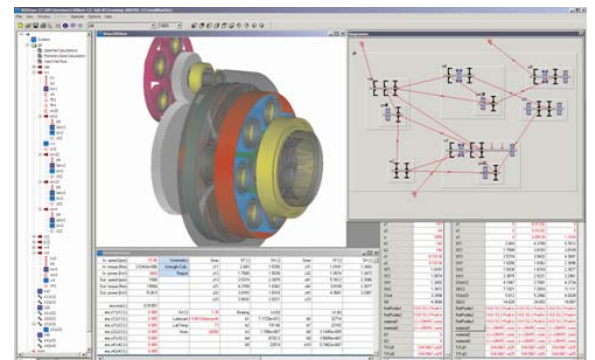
Gearbox design software including the effect of CVT transmission on gear and bearing loads [11]
